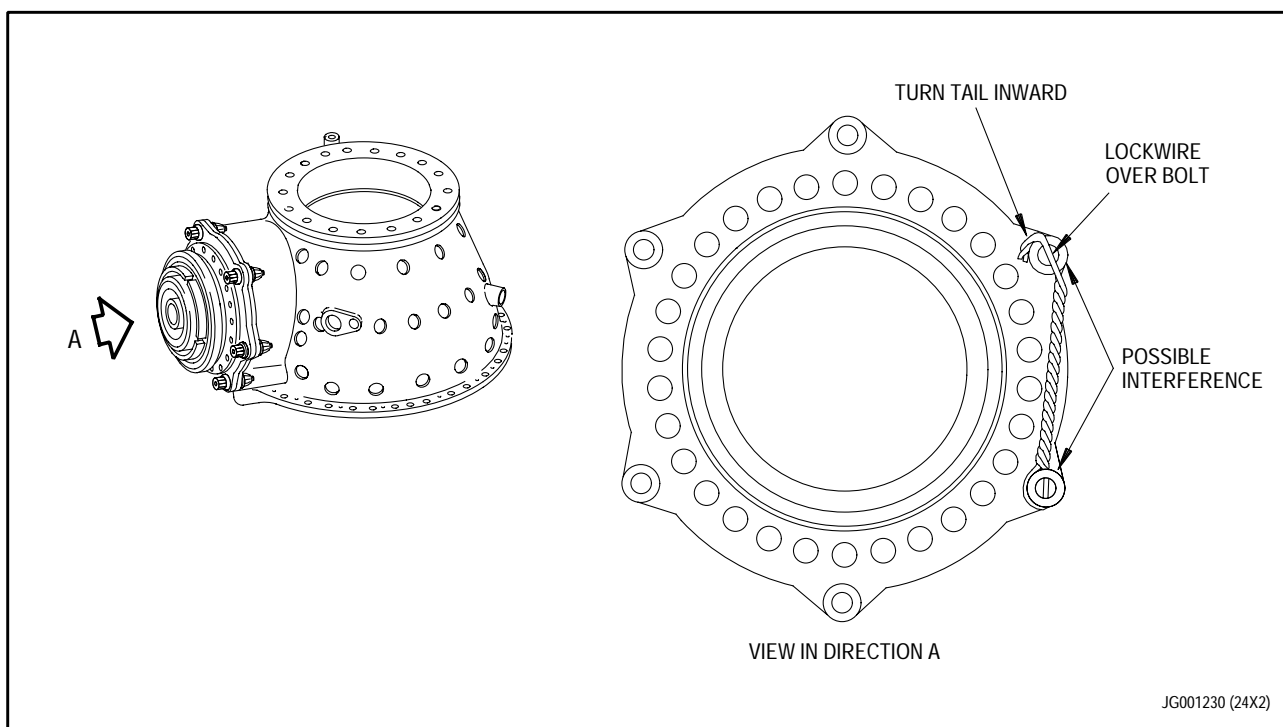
Lockwiring Gearbox Drive Bevel Gearshaft Bolts
